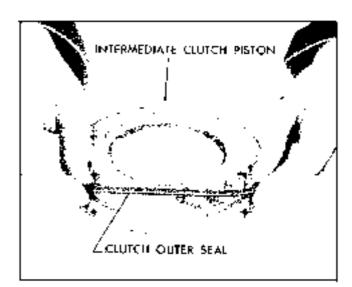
Installing Intermediate Clutch Cuter Seal
